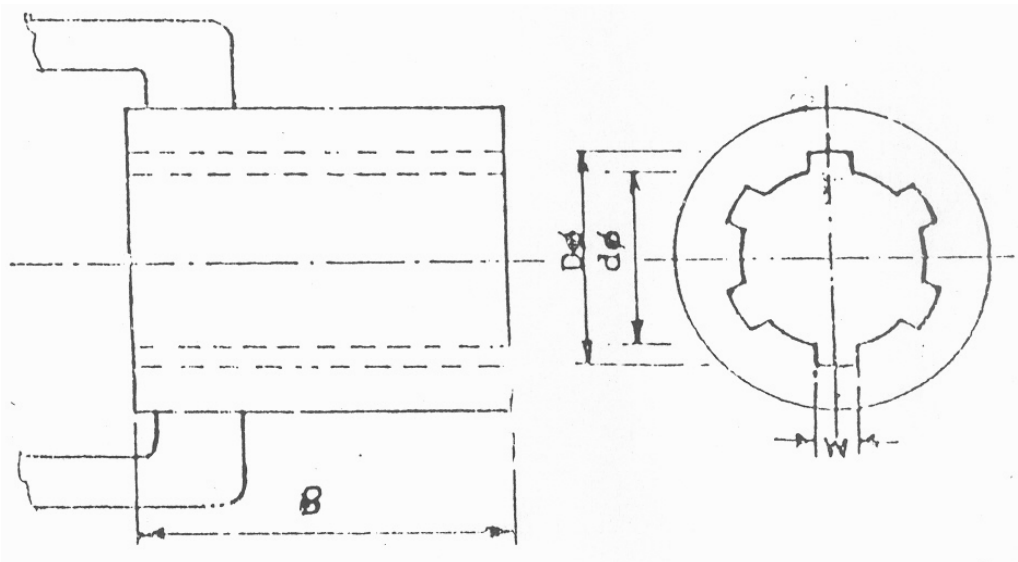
Propeller Shaft Insert Dimensions, (mm)
